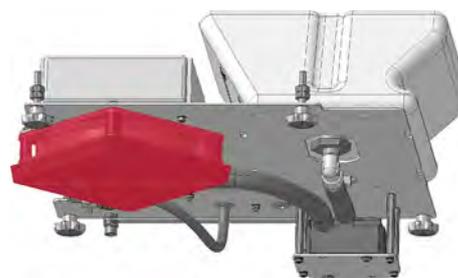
SPINDLE COOLING FAN (VIEW FROM BELOW)
